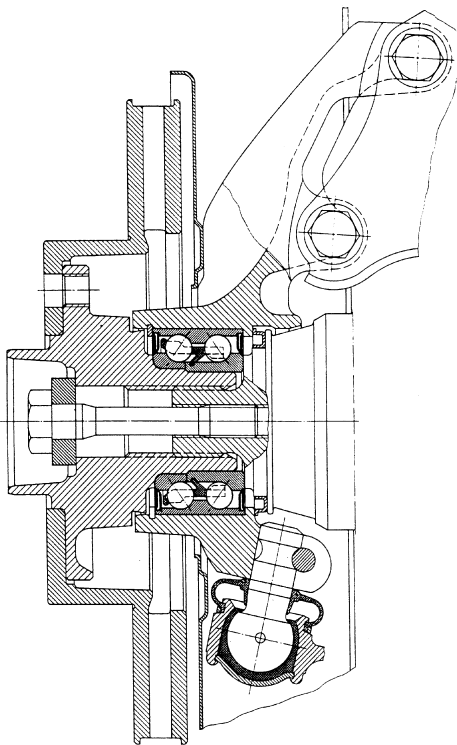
Sealed-for-life bearing in the front wheel of a front-wheel-drive car (from FAG, 1988, with permission).
